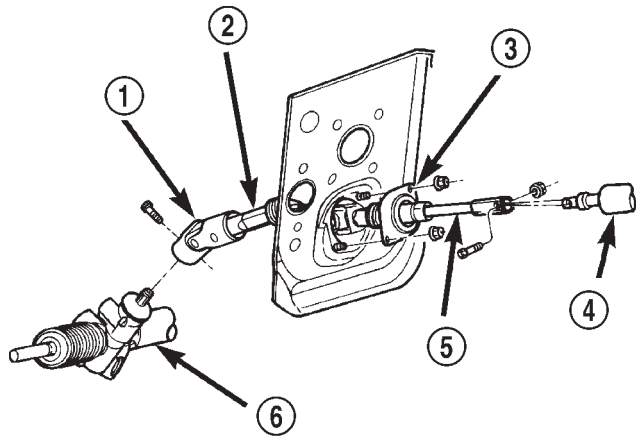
Rack & Pinion Steering Gear - 4x2
